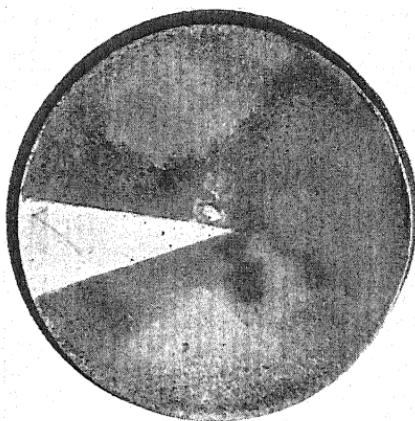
Piston Crown (from the Same Engine) with Carbon Partly Removed
